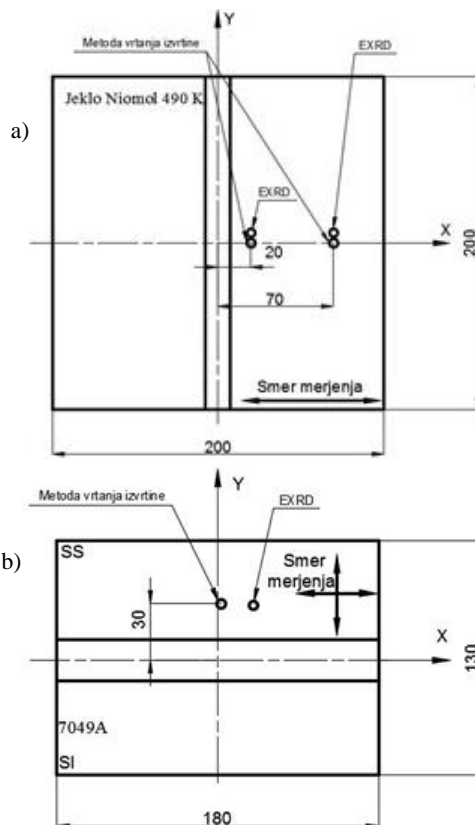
Position and direction of measurements on weld of: a) Niomol 490 K, b) aluminium alloy 7049A.
